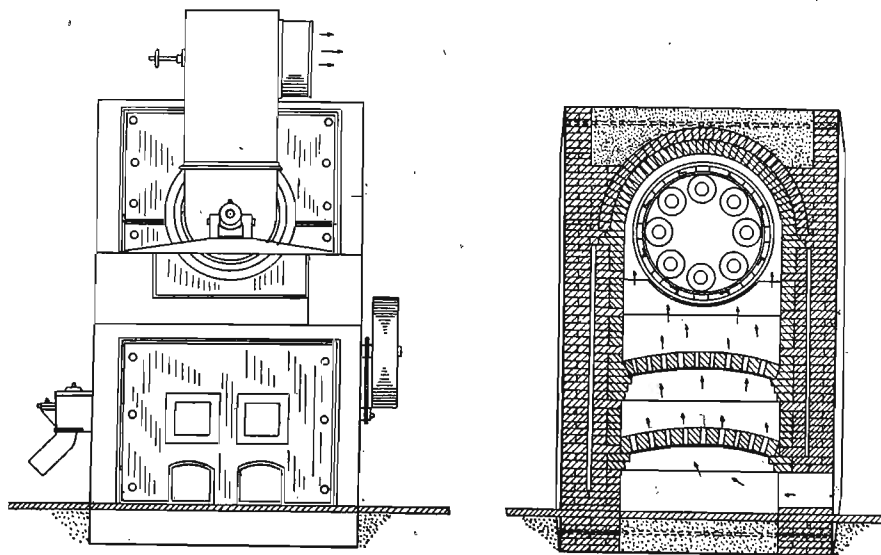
End view Rotary calciner. Cummer type. Courtesy Department of Mines, Canada.
